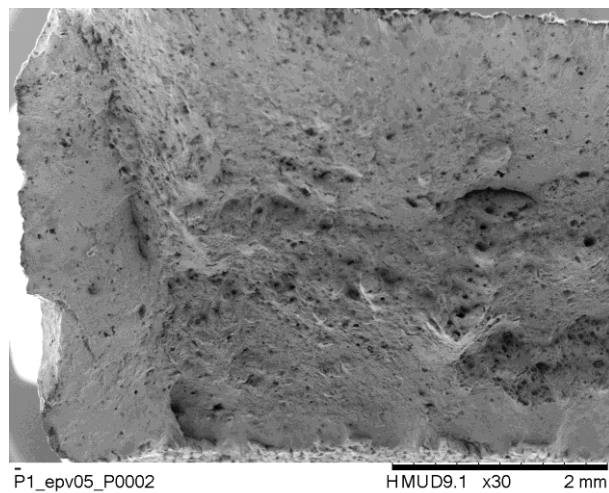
Fracture surface of specimen P1-S5 (scenario of fatigue crack initiation and growth is not clear)
